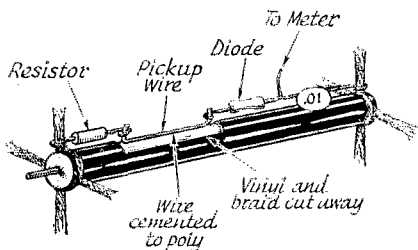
How the pickup loop is mounted on the section of coaxial cable, in a "window" cut through the vinyl outer jacket and shield braid. Epoxy cement is used to hold the wire to the polystyrene inner insulation. Pigtailed at ends should be in final position on coax connectors before the resistor and capacitor leads are soldered. For bidirectional power indications a similar assembly is installed on the opposite side of the cable section.
